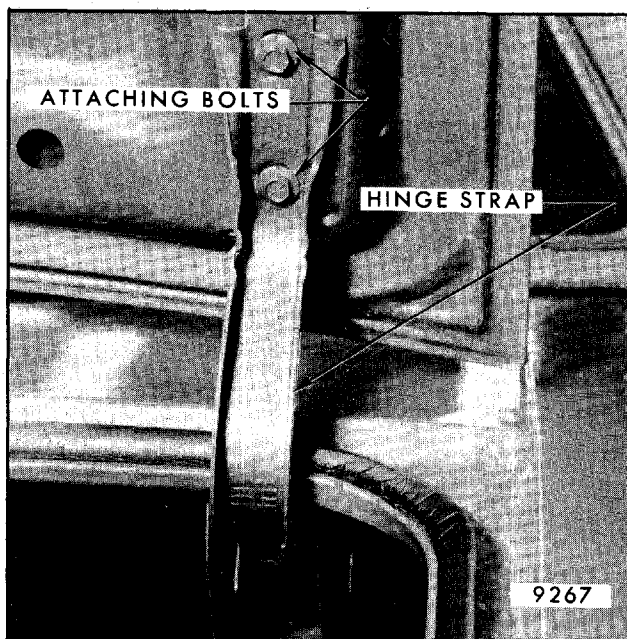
"A" Style Rear Compartment Hinge to Lid Attachment
